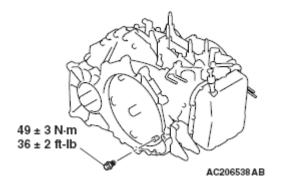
Removing Torque Converter Connecting Bolt With Torque Specification Courtesy of MITSUBISHI MOTOR SALES OF AMERICA.
